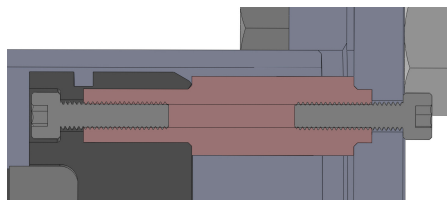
Cross section of one cylinder (in red) in the assembly
